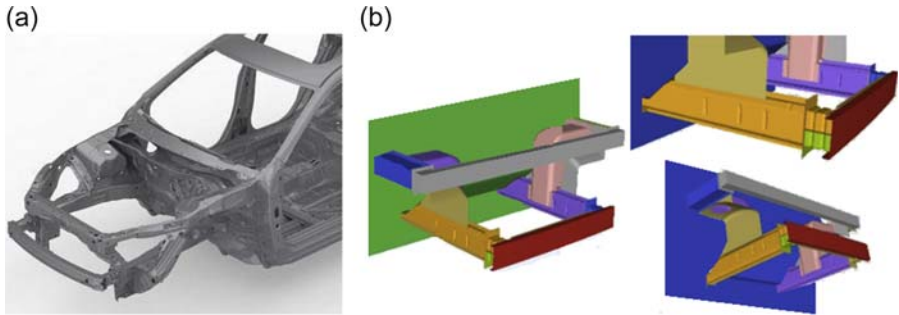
Front bumper assembly of a vehicle. (a) Real. (b) Modeled.
